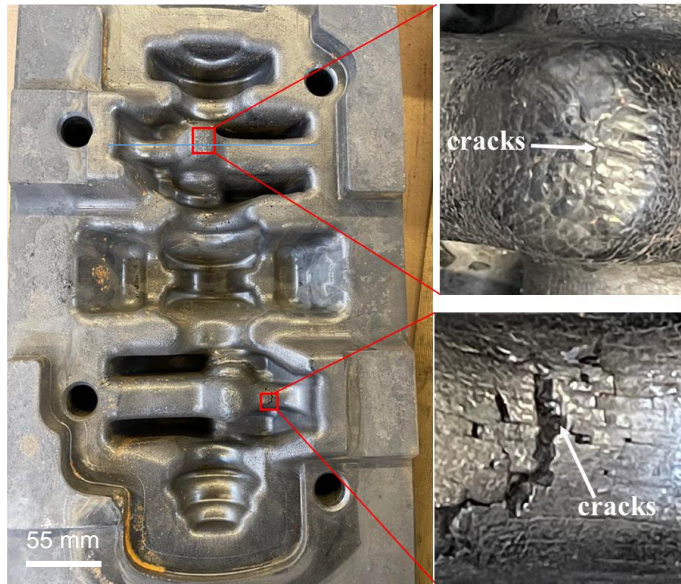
Mechanical fatigue observed in the hot forging die for crankshafts (20,000 cycles) at Stellantis
